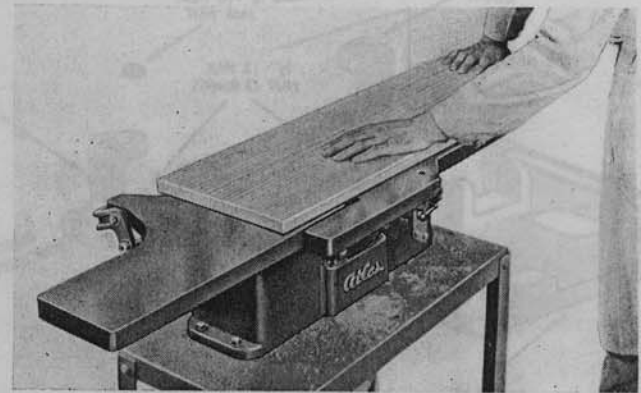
Guard removed and fence locking bracket lowered for handling extra wide boards.
